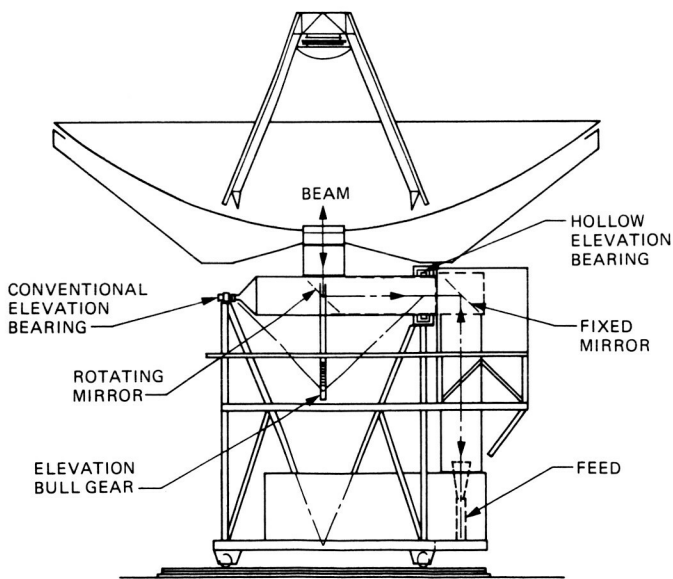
A beam waveguide antenna layout with hollow elevation bearing tube, Concept B
